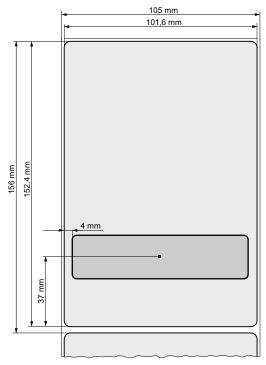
SIMATIC RF630L 6GT2810-2AB00 dimension drawing
